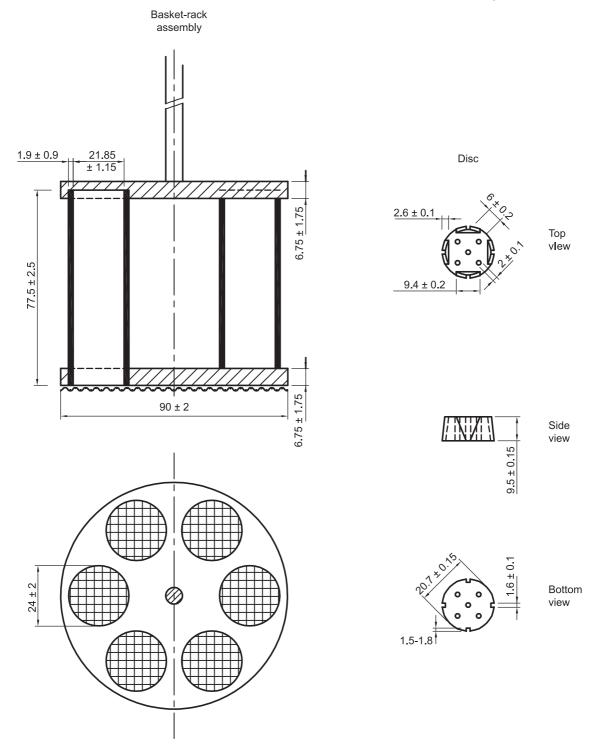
1. – Disintegration apparatus A Dimensions in millimetres
